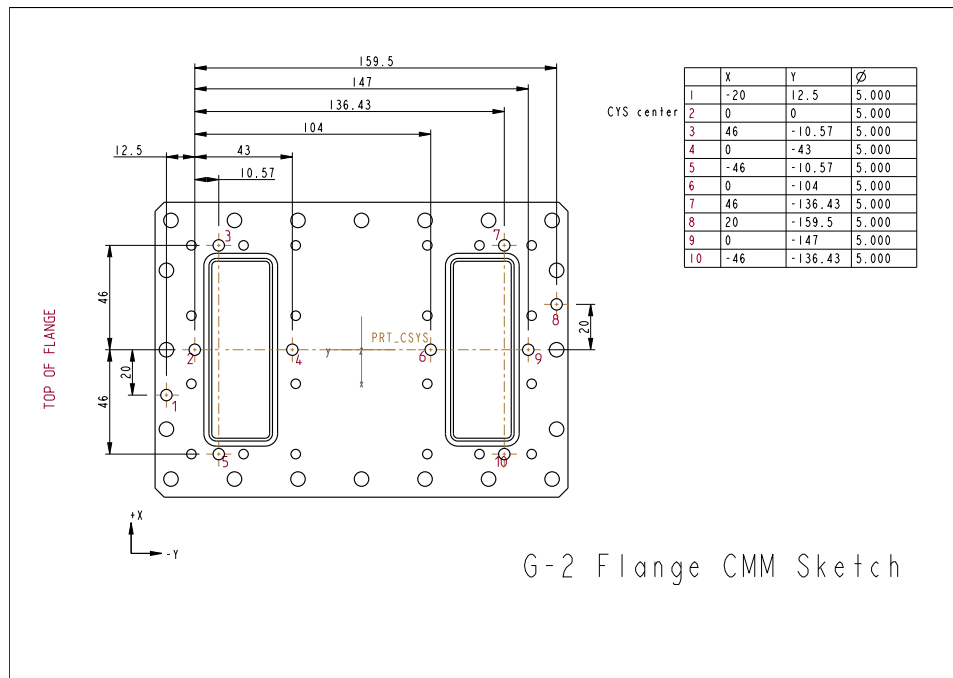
Engineering drawing of the flange with the nominal hole positions and sizes displayed.
